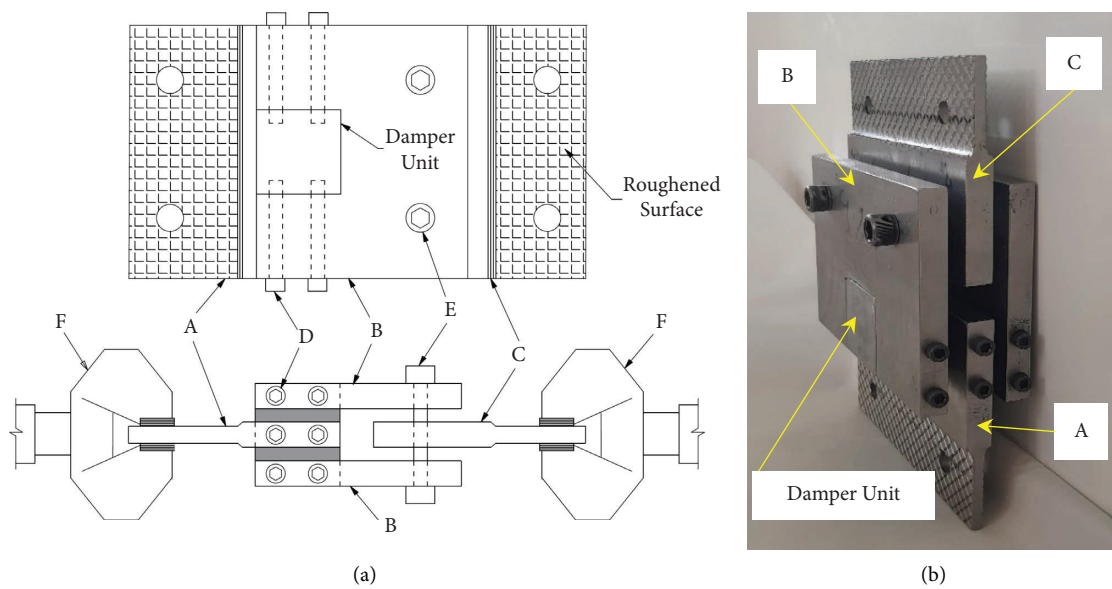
Prototype viscoelastic damper assembly: (a) sketch of components (plan and side views); (b) photo of the damper assembly.
